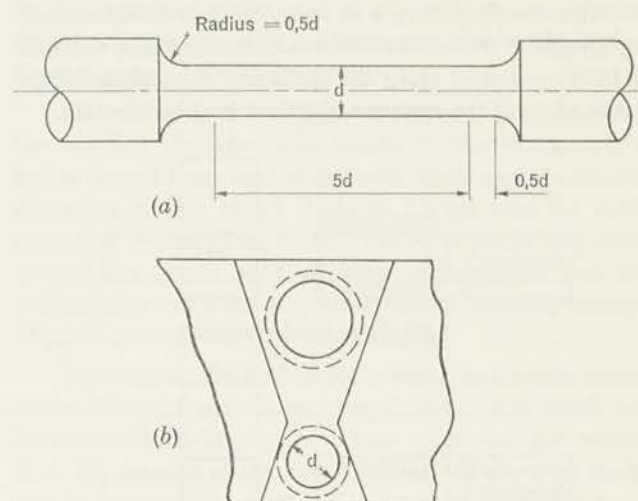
SPECIMEN NO. 1 TENSILE TEST FOR ALL WELD METAL
